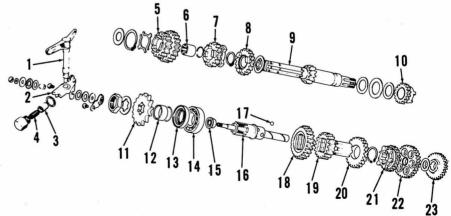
Exploded view of transmission used in TC 90 models. Eight steel balls (17) are used.
